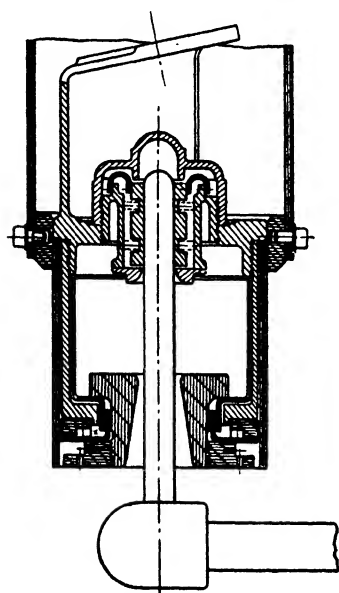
SECTION THROUGH A PLAIN EXPLOSION POT CONTACT
